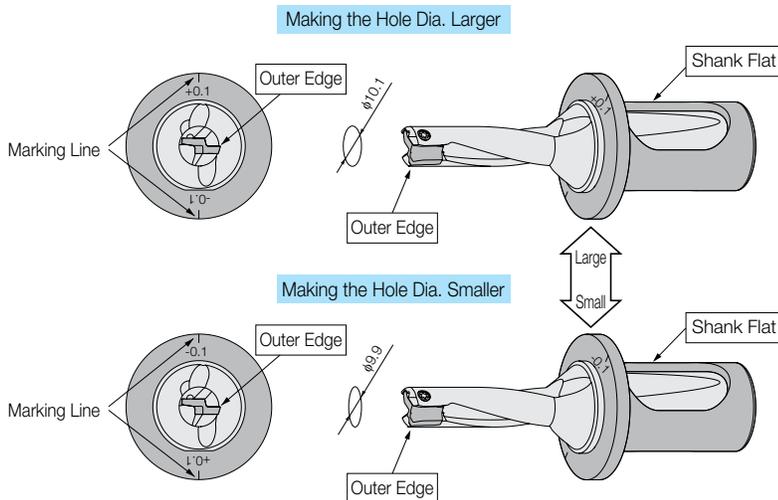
Diameter Adjustment Method (e.g.) Ø10mm Drill
